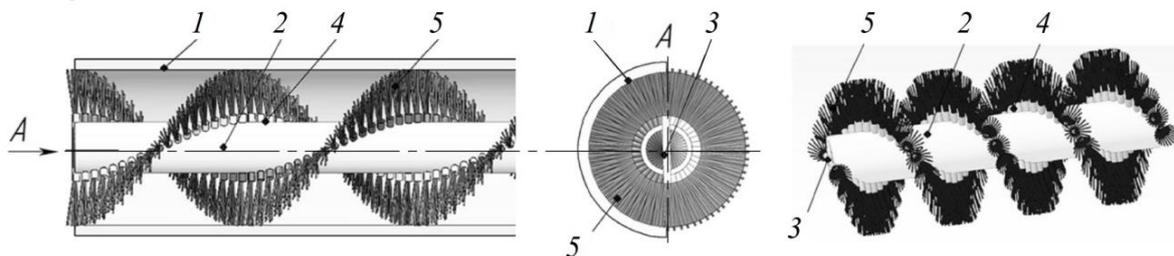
Design of a screw conveyor with an elastic brush-like screw
